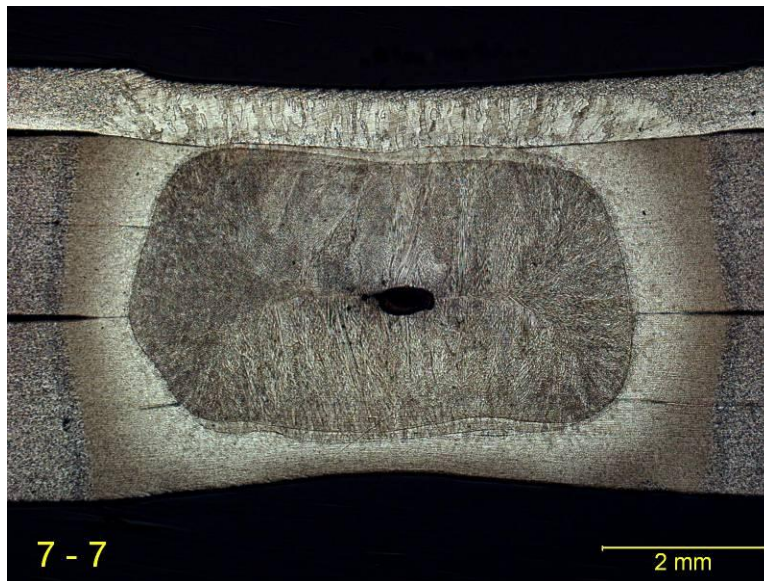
Cross Section of the Weld in Trial 7, Showing 0% Penetration into the Attached Thin Sheet (This weld was made under conditions of a Class 2 electrode on the thin sheet side, a 6.3-mm electrode on the thick sheet side, a 420-ms weld time, two pulses in the main current, a secondary to primary force ratio of 1.5, a primary to total weld time ratio of 0.65, a 2400-N weld force, and a secondary to primary current ratio of 1.4)
